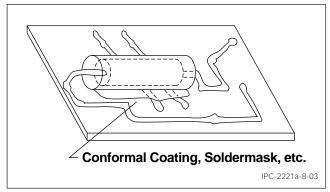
Axial-Leaded Component Mounted Over Conductors
